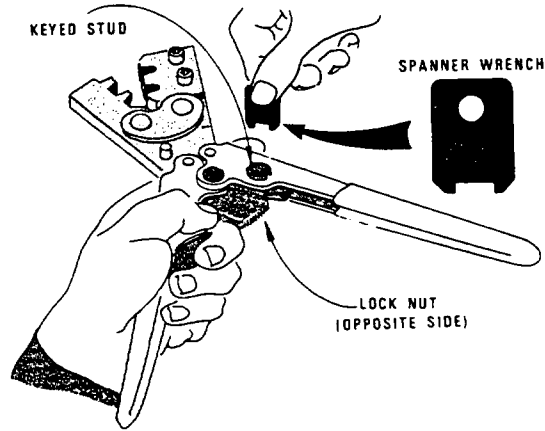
CRIMPING PRESSURE ADJUSTMENT
